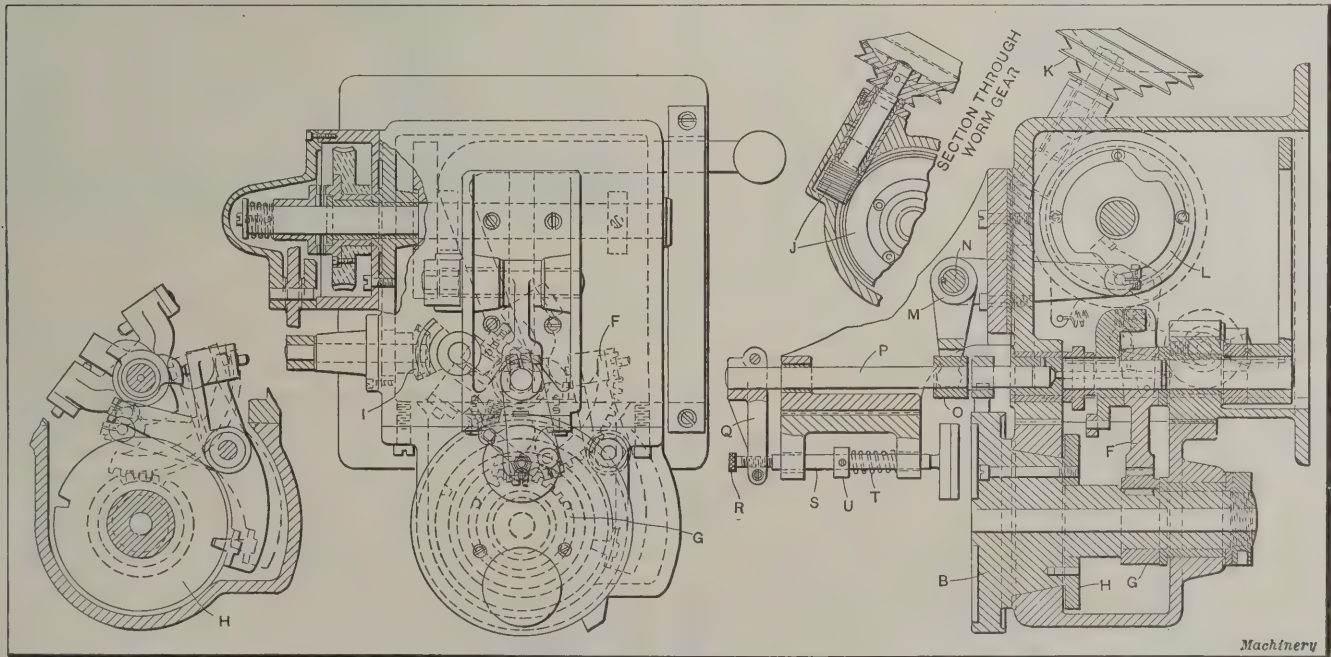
Construction of the Dial Printing Machine shown in Fig. 48
